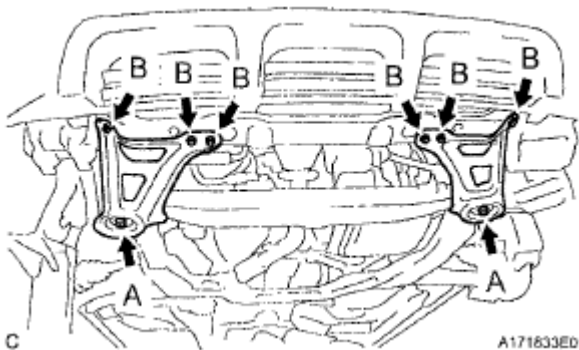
Locating Frame Side Rail Plates, Bolts And Nuts
